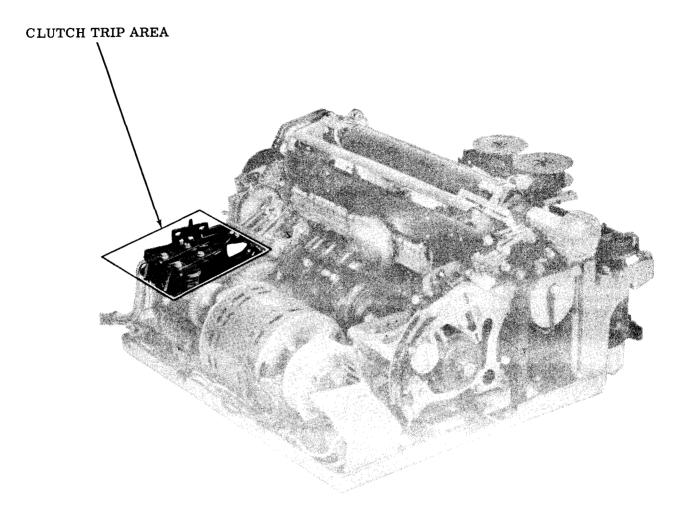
Clutch Trip Area (Without Reader Feed Magnet Contact Assembly)
